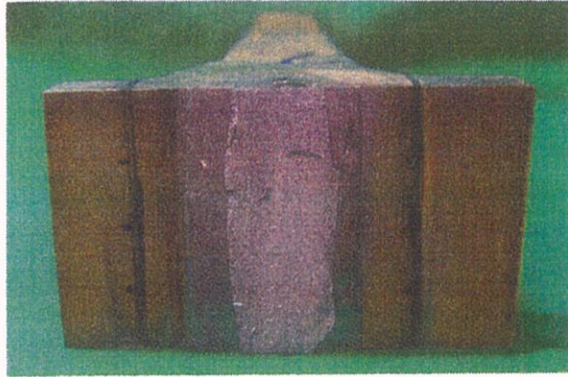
Fracture surface after tensile fracture toughness test (TCI-2, -106°C)
